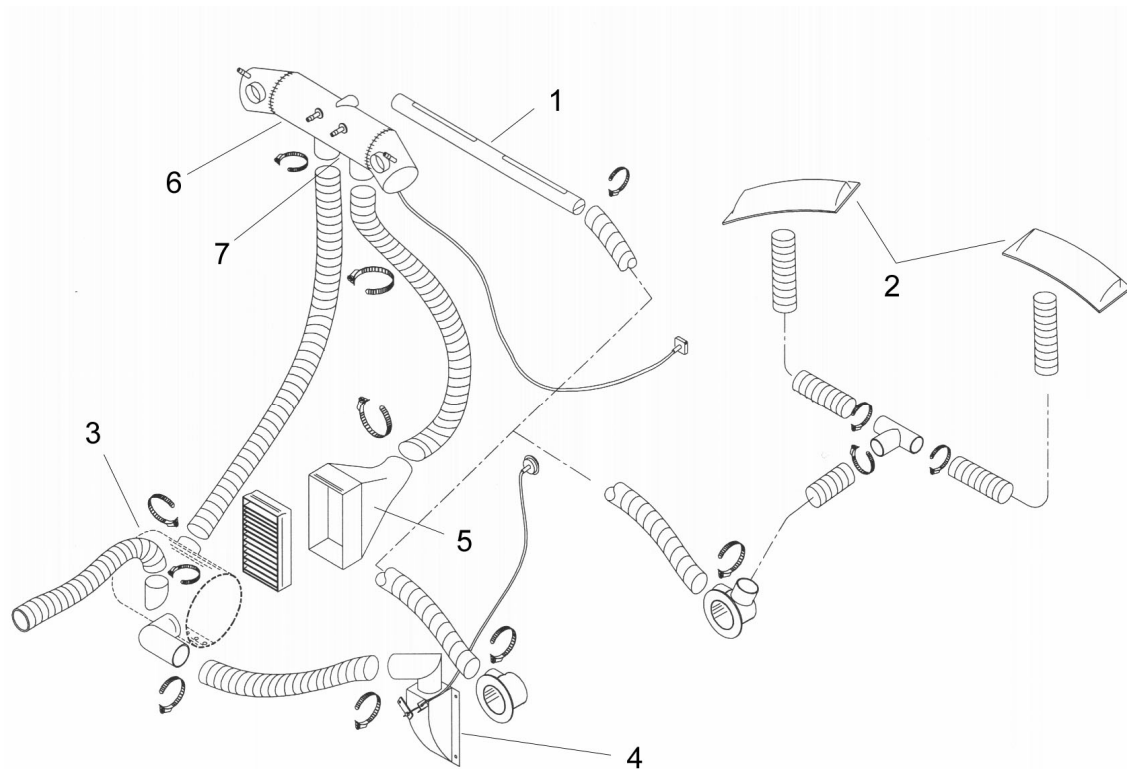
CARBURETTOR HEAT AND CABIN HEAT SYSTEMS
